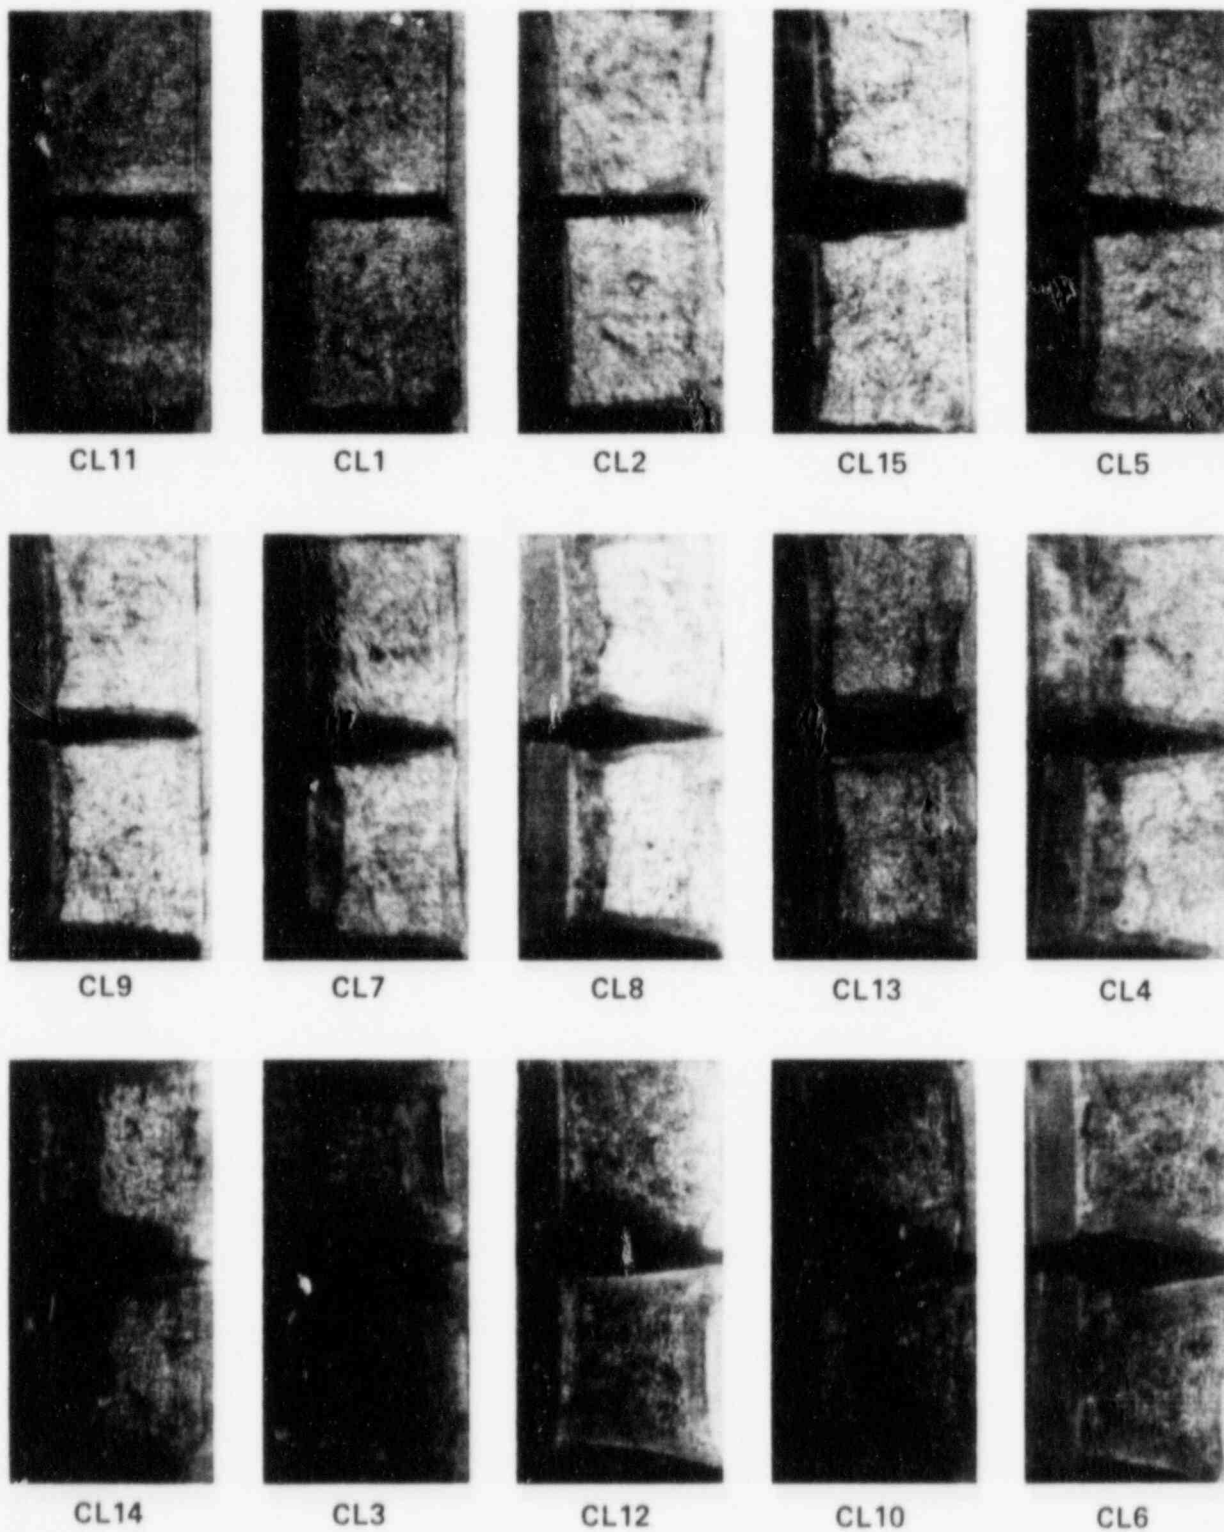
Charpy Impact Specimen Fracture Surfaces for V.C. Summer Unit 1 Reactor Pressure Vessel Intermediate Shell Plate A9154-1 (Longitudinal Orientation)
